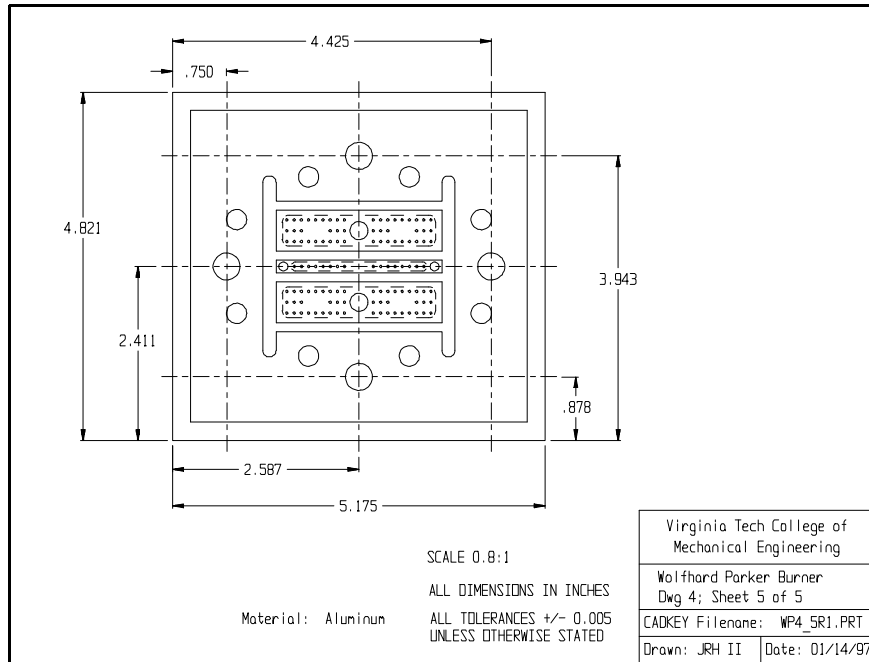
Burner Mounting Base, Drawing 4 Sheet 5 of 5
